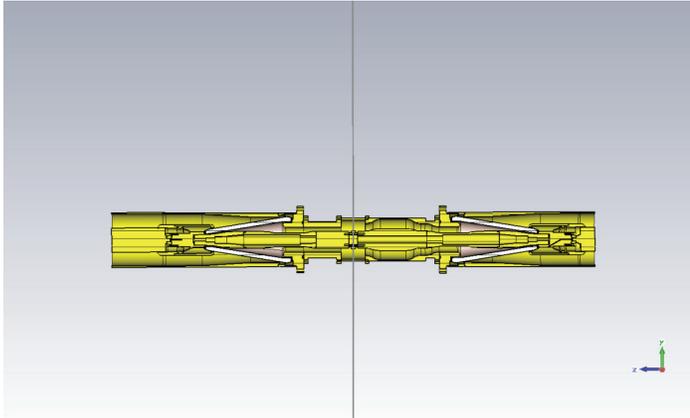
The side-profile of these two feed-throughs which are reoriented to become joined at the strap mounting pieces.
